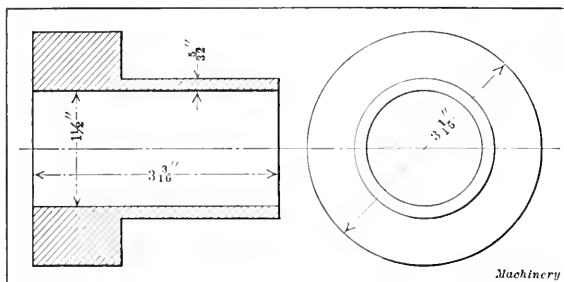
Example of Work handled by Cleveland Rotary Tilting Magazine
